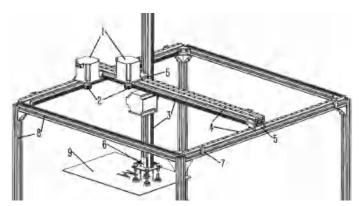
Assembly diagram of main parts of sorting robot. (1) Stepper motor, (2) Gear, (3)Rack, (4) Linear guide rail, (5) Slider, (6) Manipulator module, (7) Limit switch, (8) Aluminum profile, (9) Paper document
